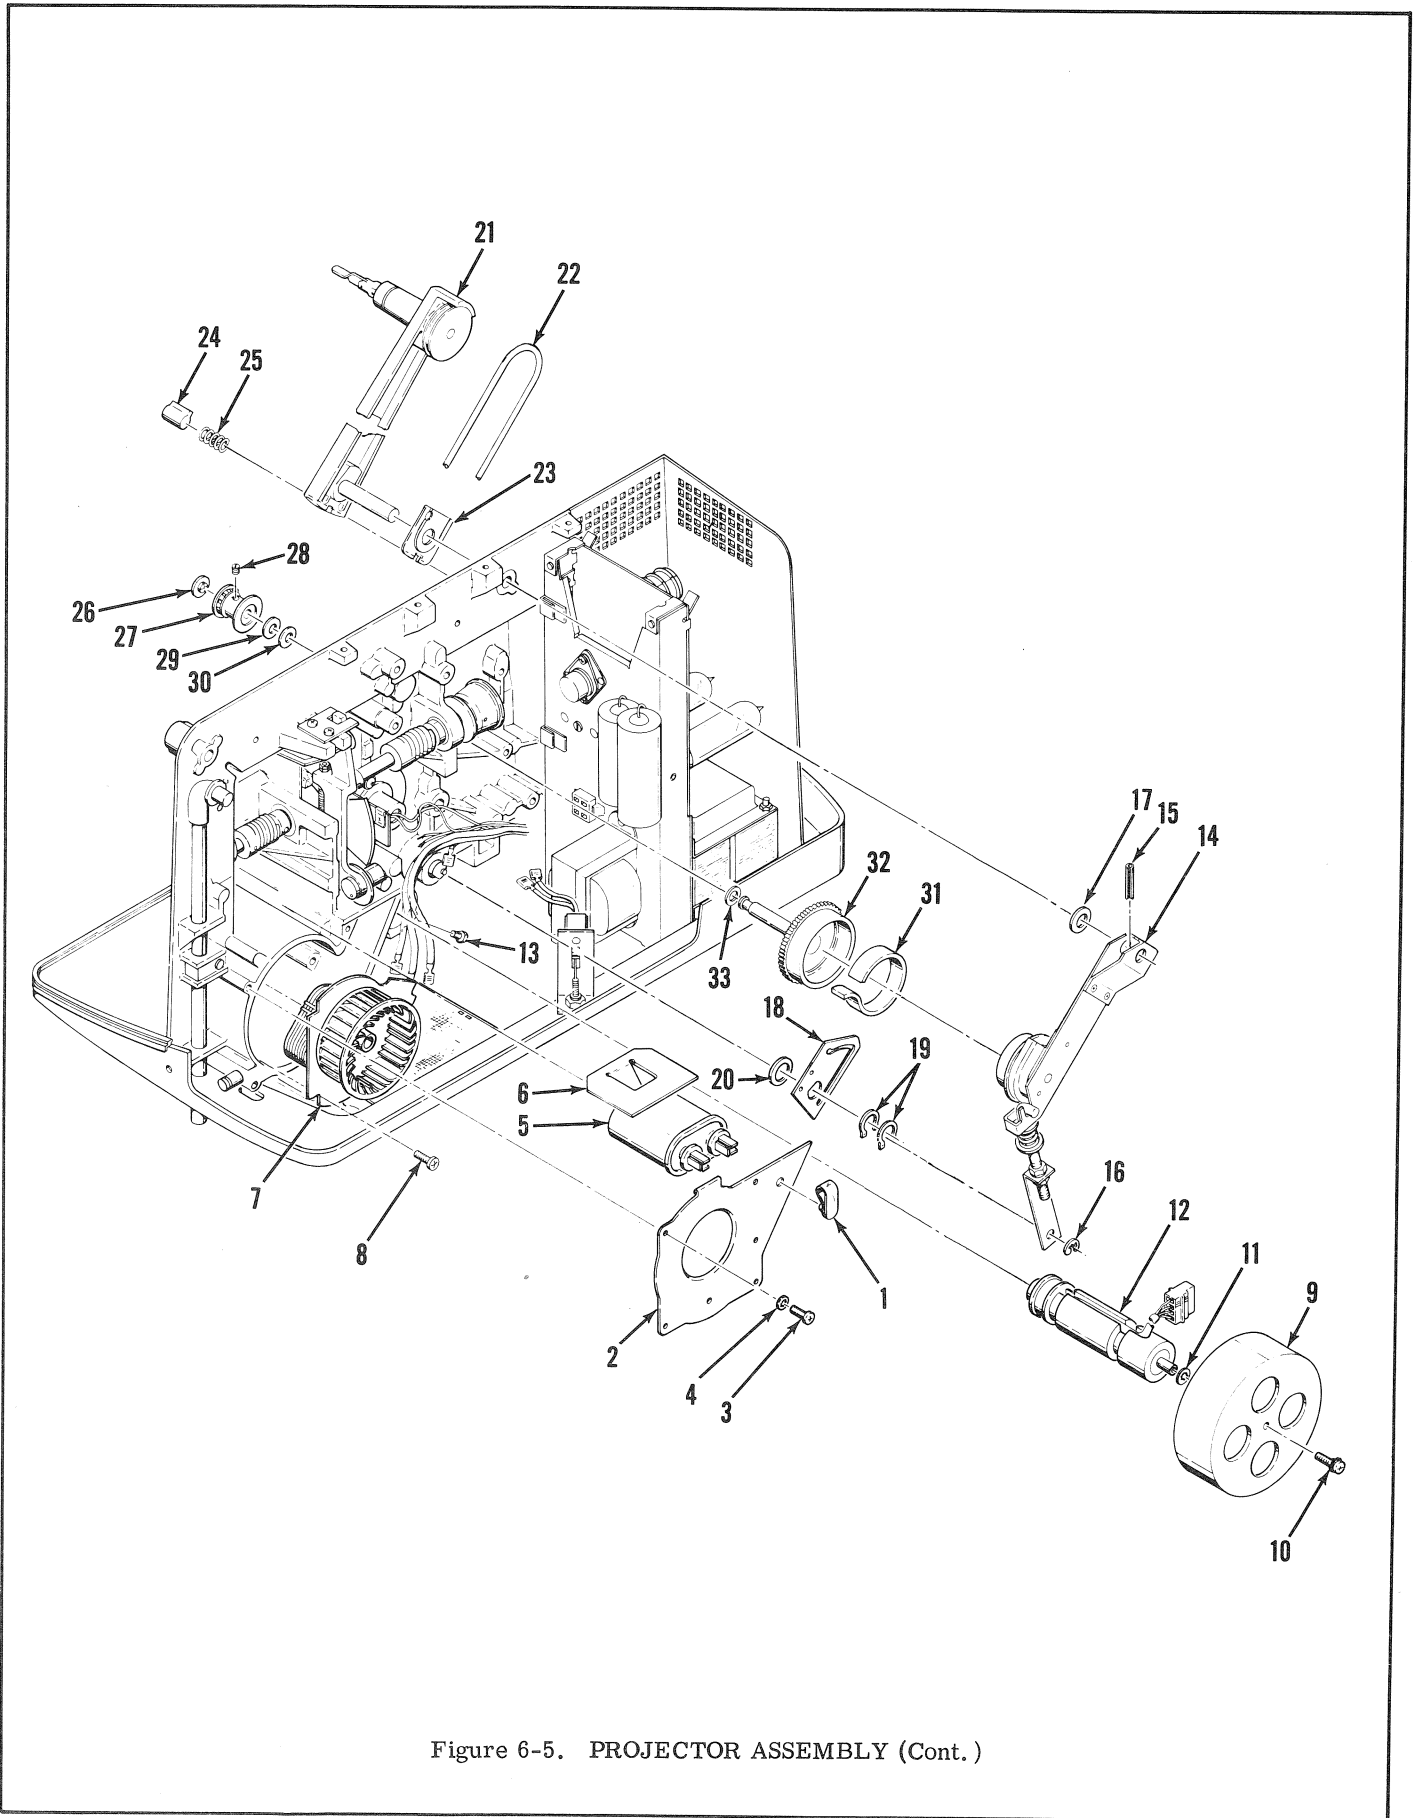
PROJECTOR ASSEMBLY (Cont.)
